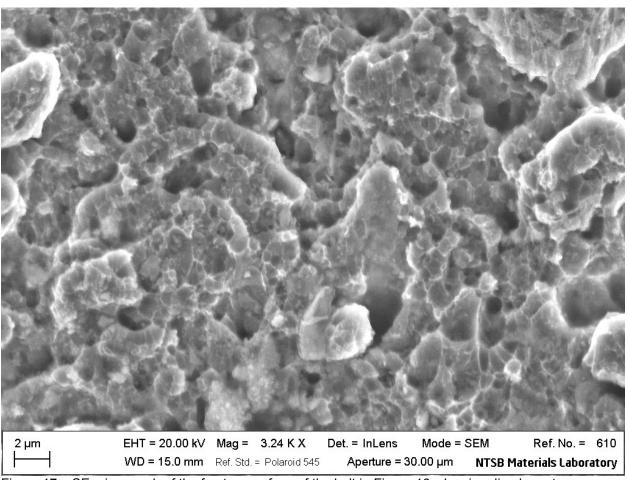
SE micrograph of the fracture surface of the bolt in Figure 16, showing dimple rupture.
